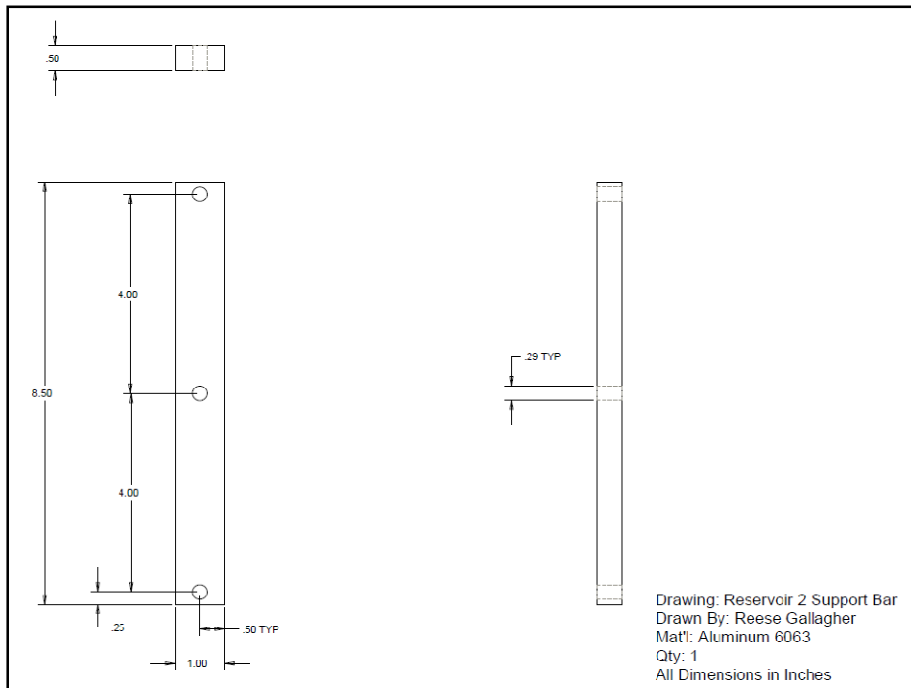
Reservoir 2 Support Bar Dimensional Drawing
